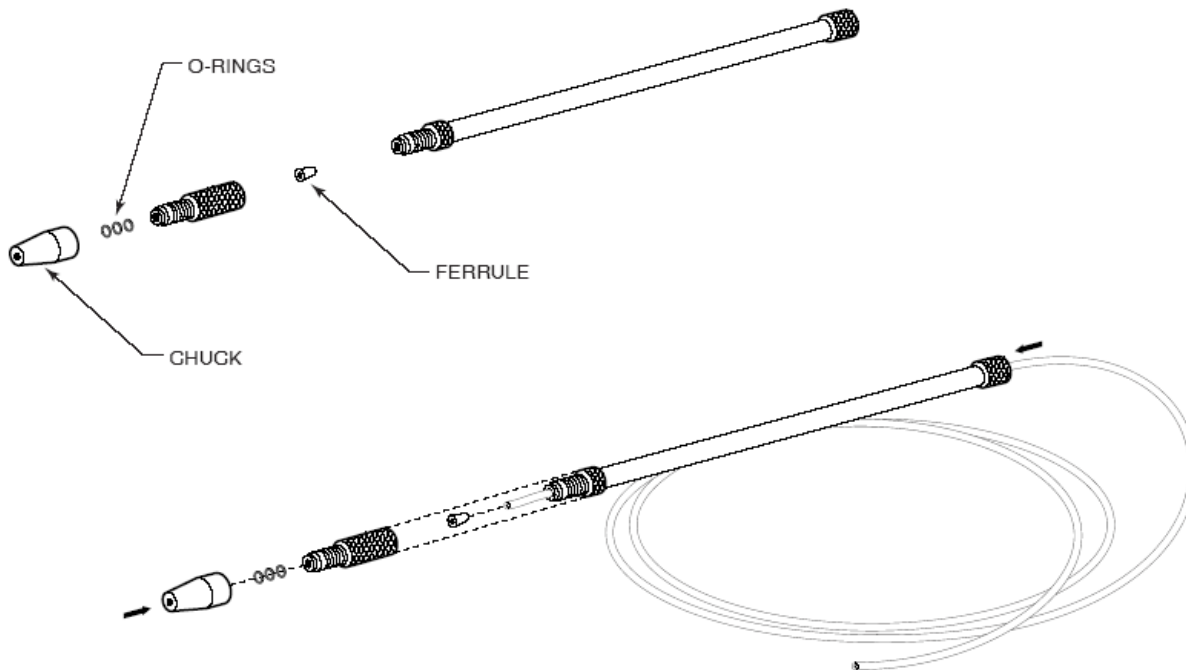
Connecting the micropipette holder to the pressure tubing.
